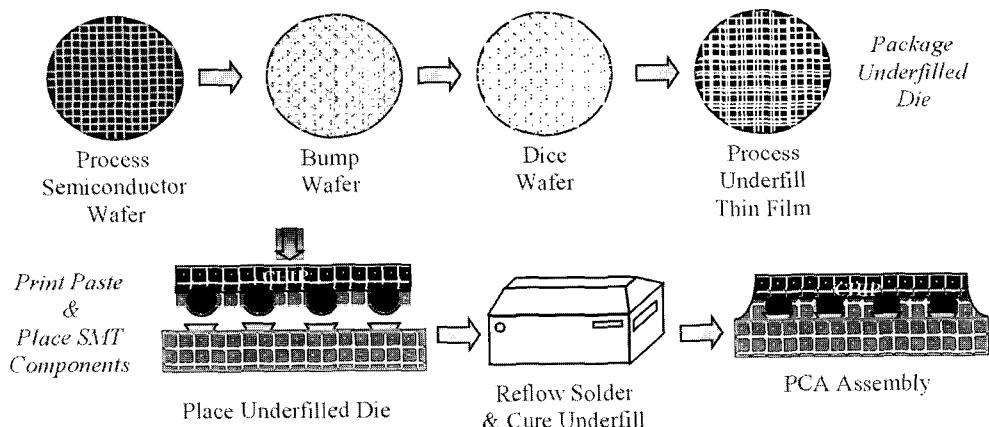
Wafer scale processing on the PCA (Printed Chip Assembly) process.
